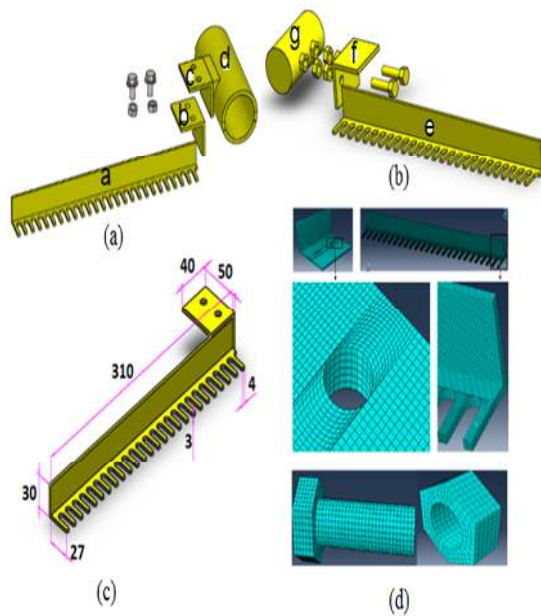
(a) OSS components; (b) ISS components; (c) Shoulder dimension in millimeter; (d) Shoulder components mesh.
